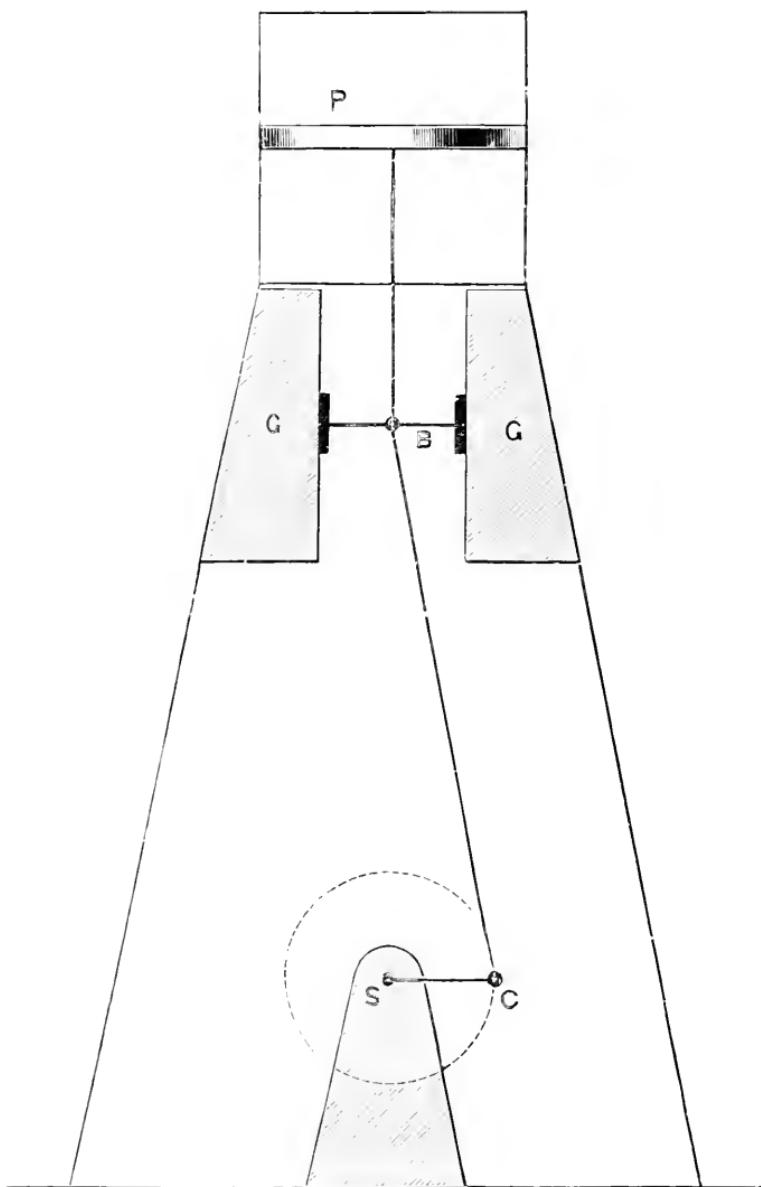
OUTLINE SKETCH ILLUSTRATING CONVERSION OF MOTION BY MEANS OF CONNECTING ROD AND CRANK.
